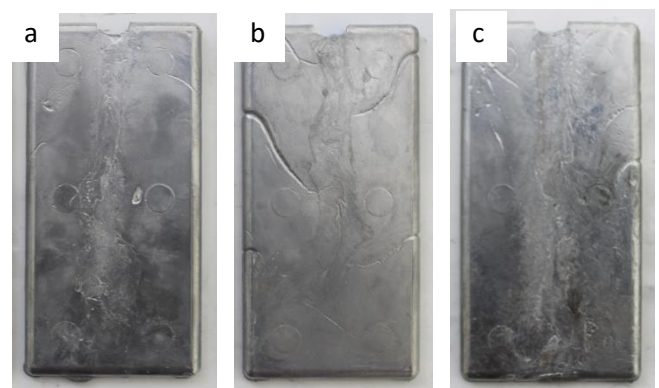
Photograph of cast samples produced by rotational mold casting at different casting conditions: (a) sample I; (b) sample II and (c) sample III.
